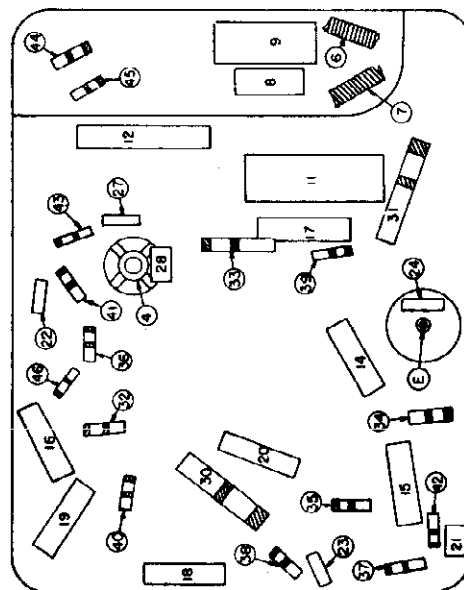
PARTS LAYOUT--DASH UNIT--Bottom View
